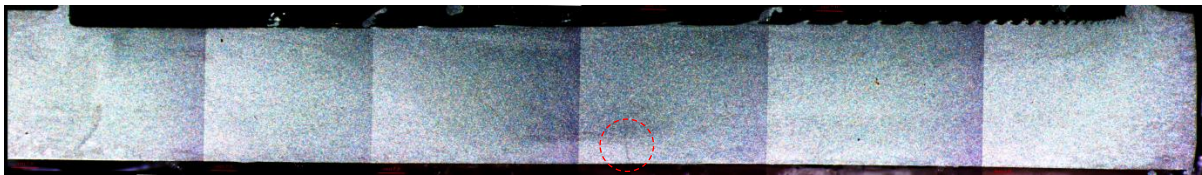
Microstructure of Friction Stir Welded Joints manufactured with numerous Parameter Combinations
